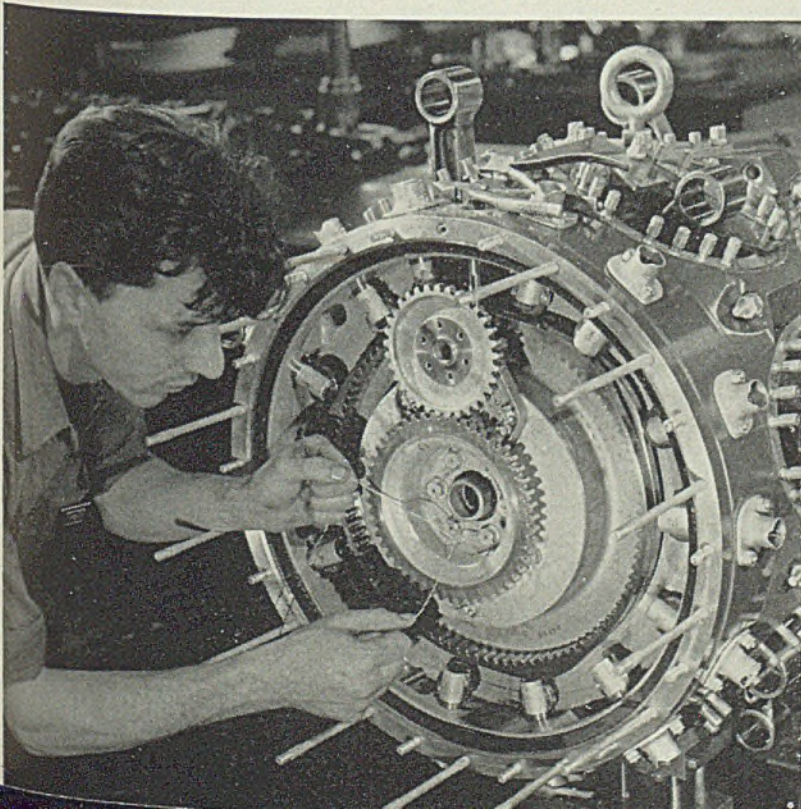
This is power section with master rod assembly and dynamic damper—the heart of the engine. It contains the crankcase center section, the crankshaft center section, the two master rods, 12 articulated rods plus valve actuating mechanisms and timing gears—more than 500 parts
